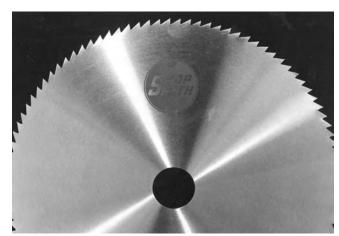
A crosscut blade has many small teeth that cleanly cut wood fibers. The blade does a fair job on miter cuts and sawing plywood. It should never be used for ripping.
